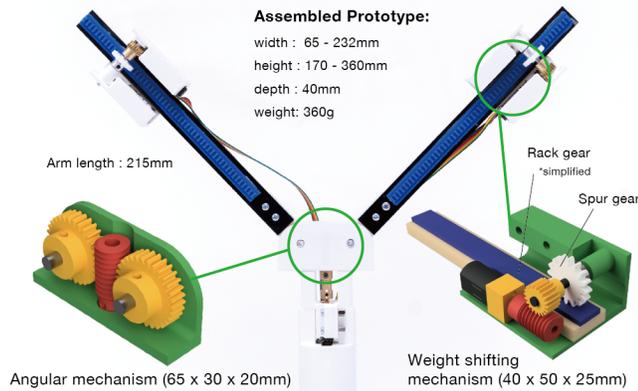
Mechanical design of the proposed device in detail. Both Angular Mechanism(left) and Weight Shifting Mechanism(right) are actuated by motor through worm gears.
